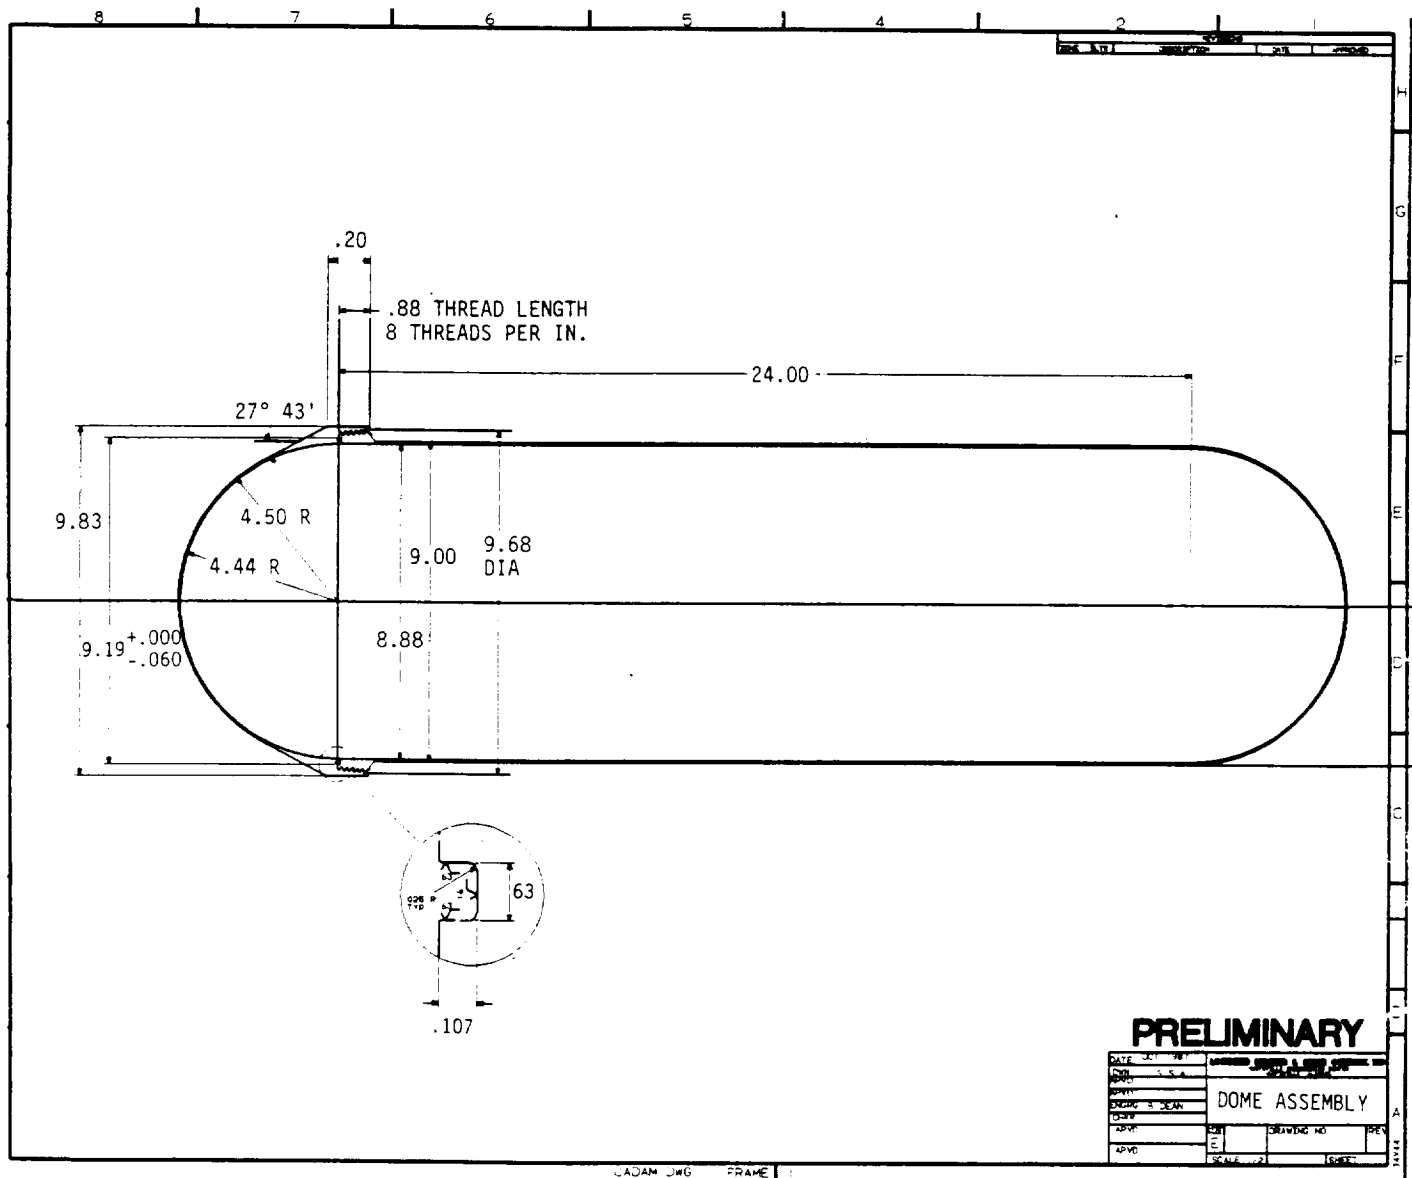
Preliminary Drawing of New Inner Tank Design for -20 °F Food Storage Demonstration Unit
